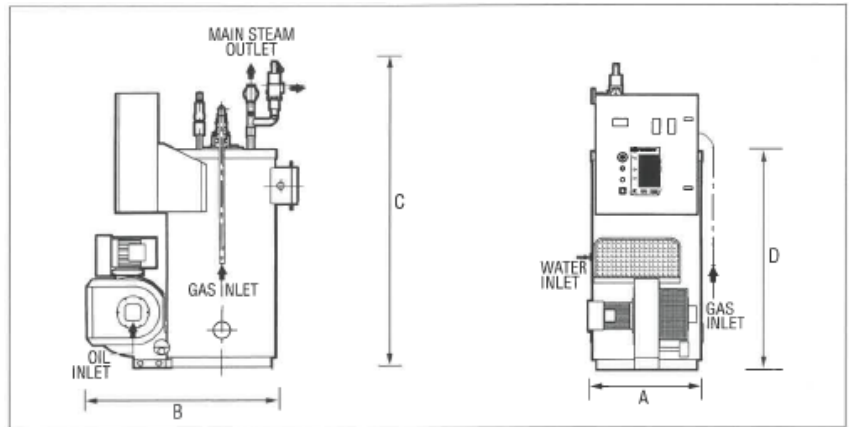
60 Bar boiler CAD drawing [22]
